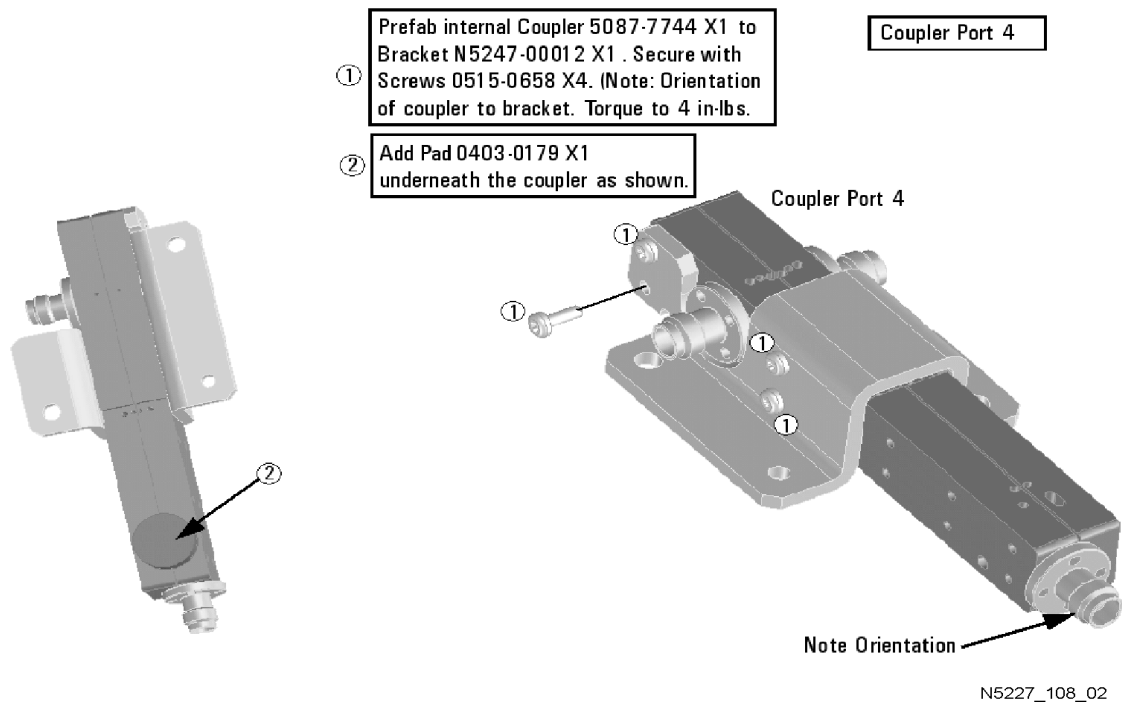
A31 Receiver Coupler Assembly (0403-0179, 0515-0658, 5087-7744, N5247-00012)
